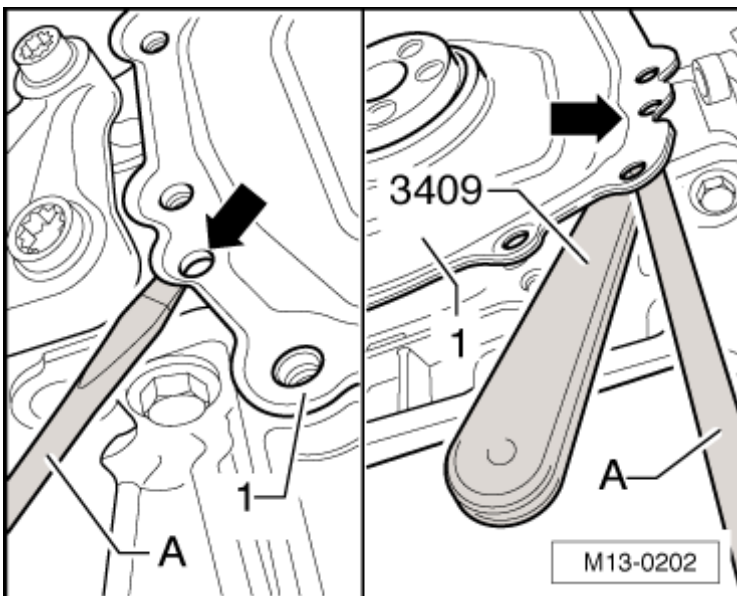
Pressing Off Sealing Flange Using Suitable Screwdriver
